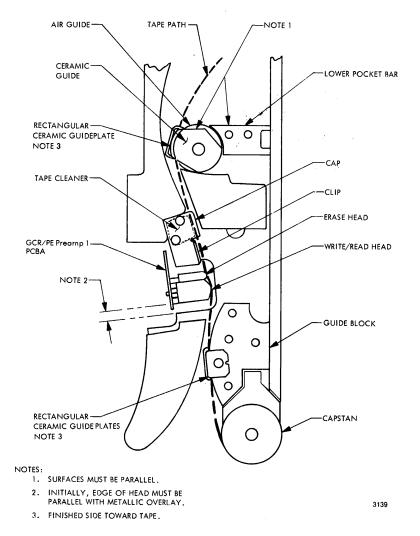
Head, Tape Cleaner Air Guide, and Guide Block Mounting
